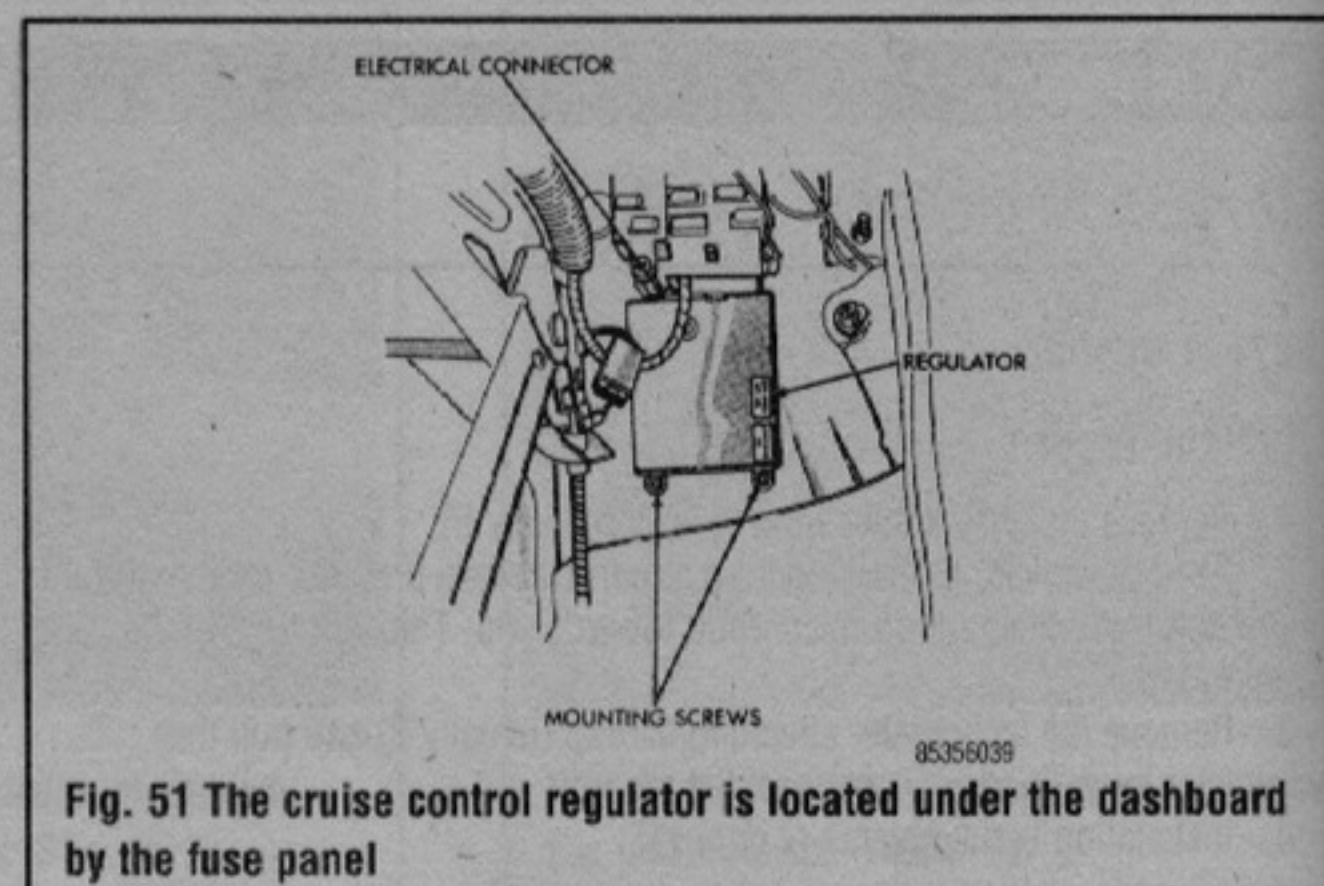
The cruise control regulator is located under the dashboard by the fuse panel
